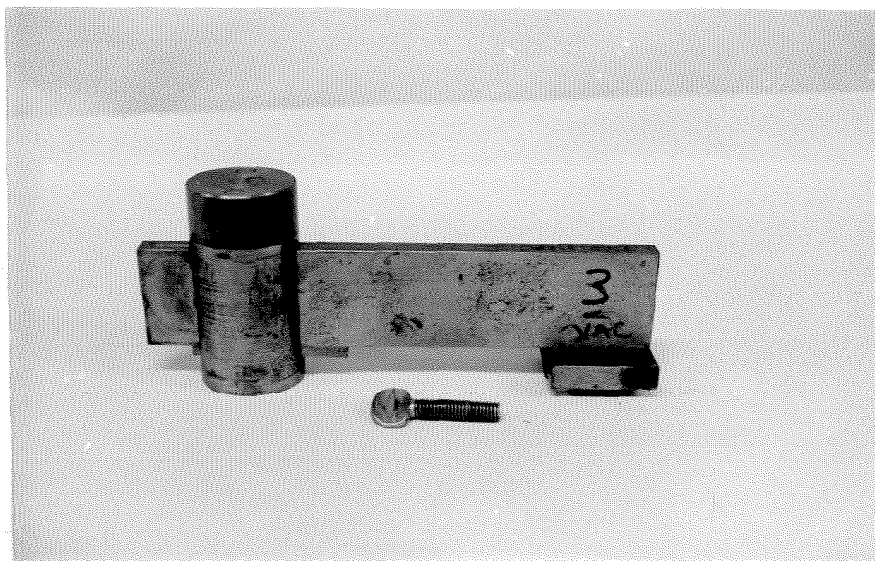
Piston Assembly, Three-Dimensional Compression Apparatus
